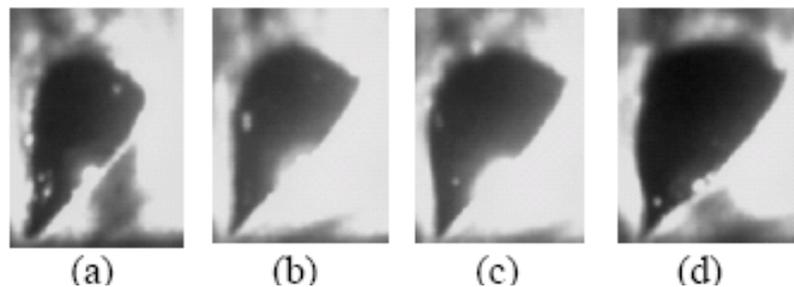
, Weld pools with different welding speed. Current: 35 A; laser beam angle: 52 degree, 1mm stainless steel, (a) 4.43 mm/s, (b) 3.87 mm/s, (c) 3.3 mm/s, (d) 2.74 mm/s
